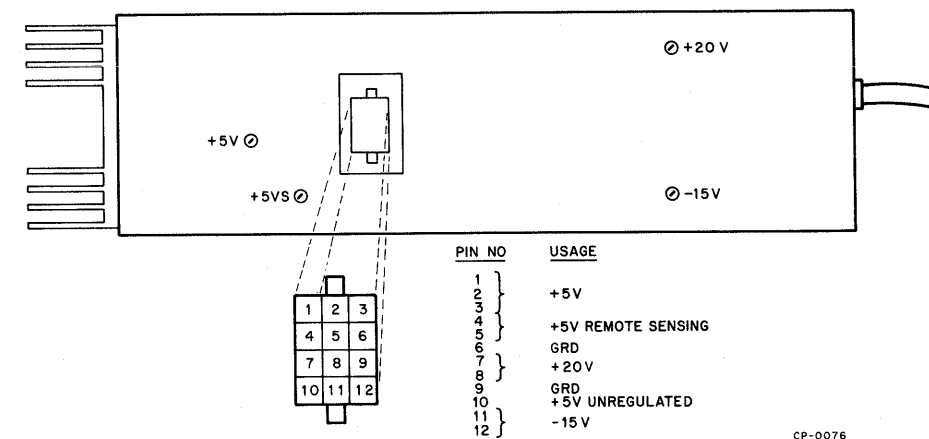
Power Supply Adjustment Location and Connector Pin Usage
